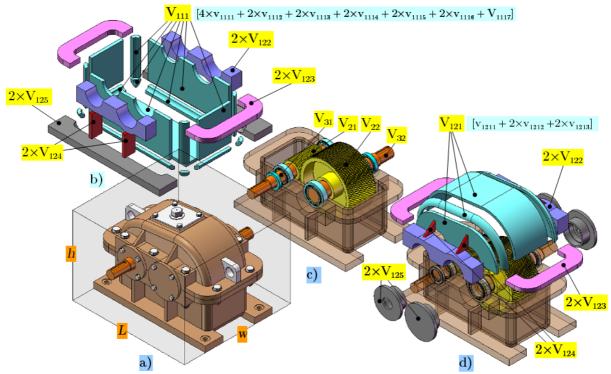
a) Completely assembled reducer; b) –exploded view of the reducer's housing body; c) –sub-assembly of the input/output reducer's shafts; d) –exploded view of the reducer's housing cover.
